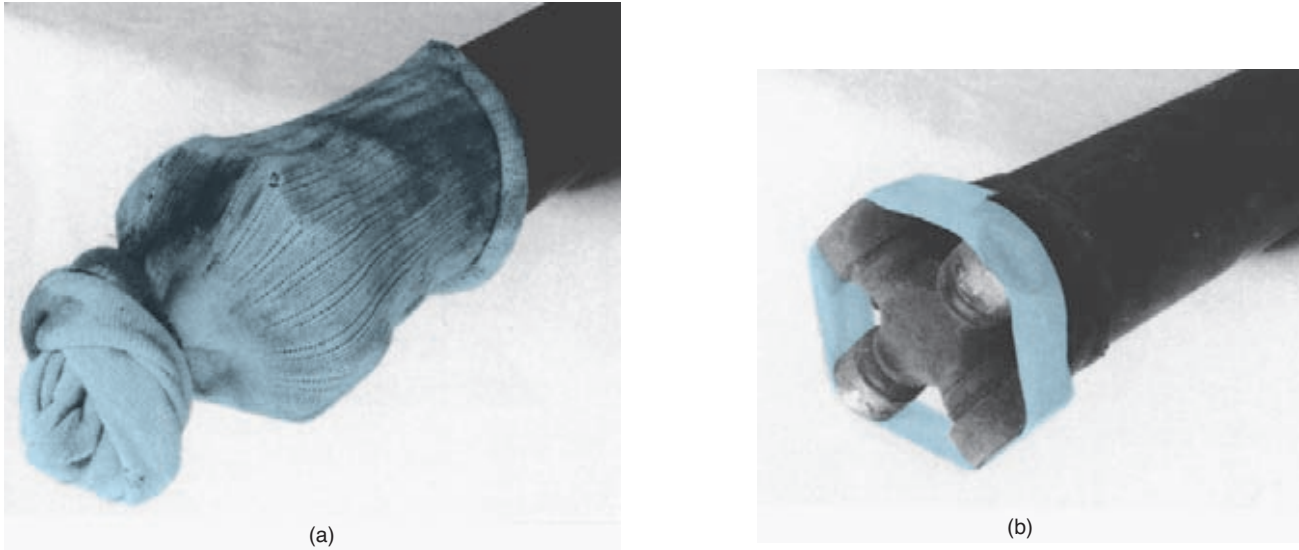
An old sock has been slid over this driveshaft to hold the bearing cups onto the U-joint (a). Tape can be used for the same purpose (b).
